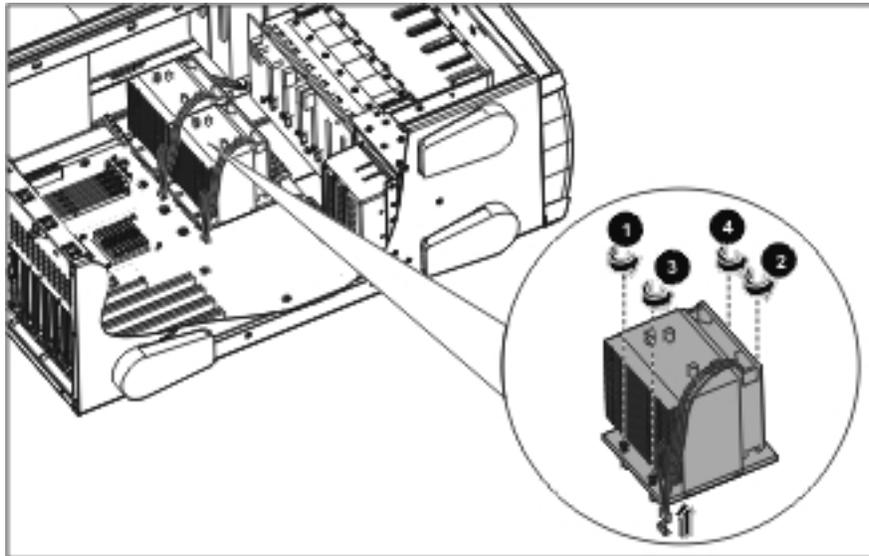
Disconnecting the cooling fan connector and removing the screws securing the heatsink
